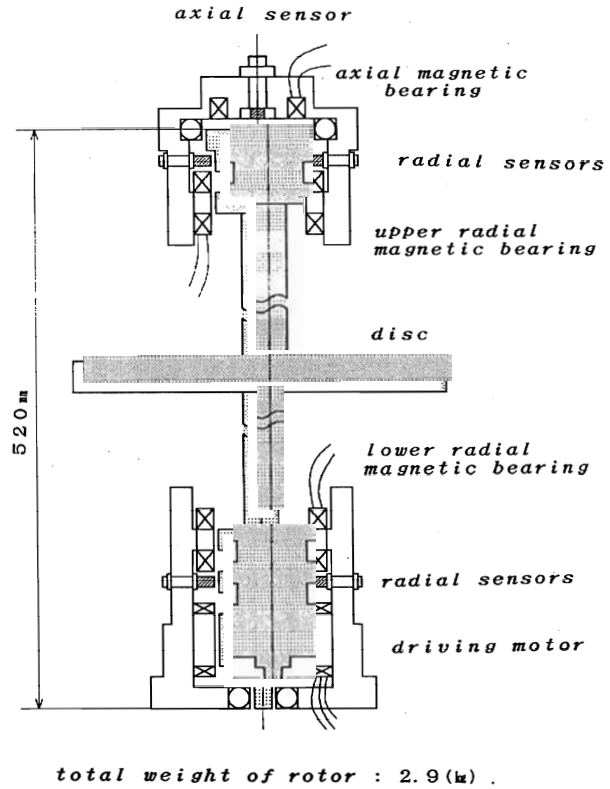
Schematic cross-sectional view of 4-axis controlled magnetic bearing and suspended flexible rotor
